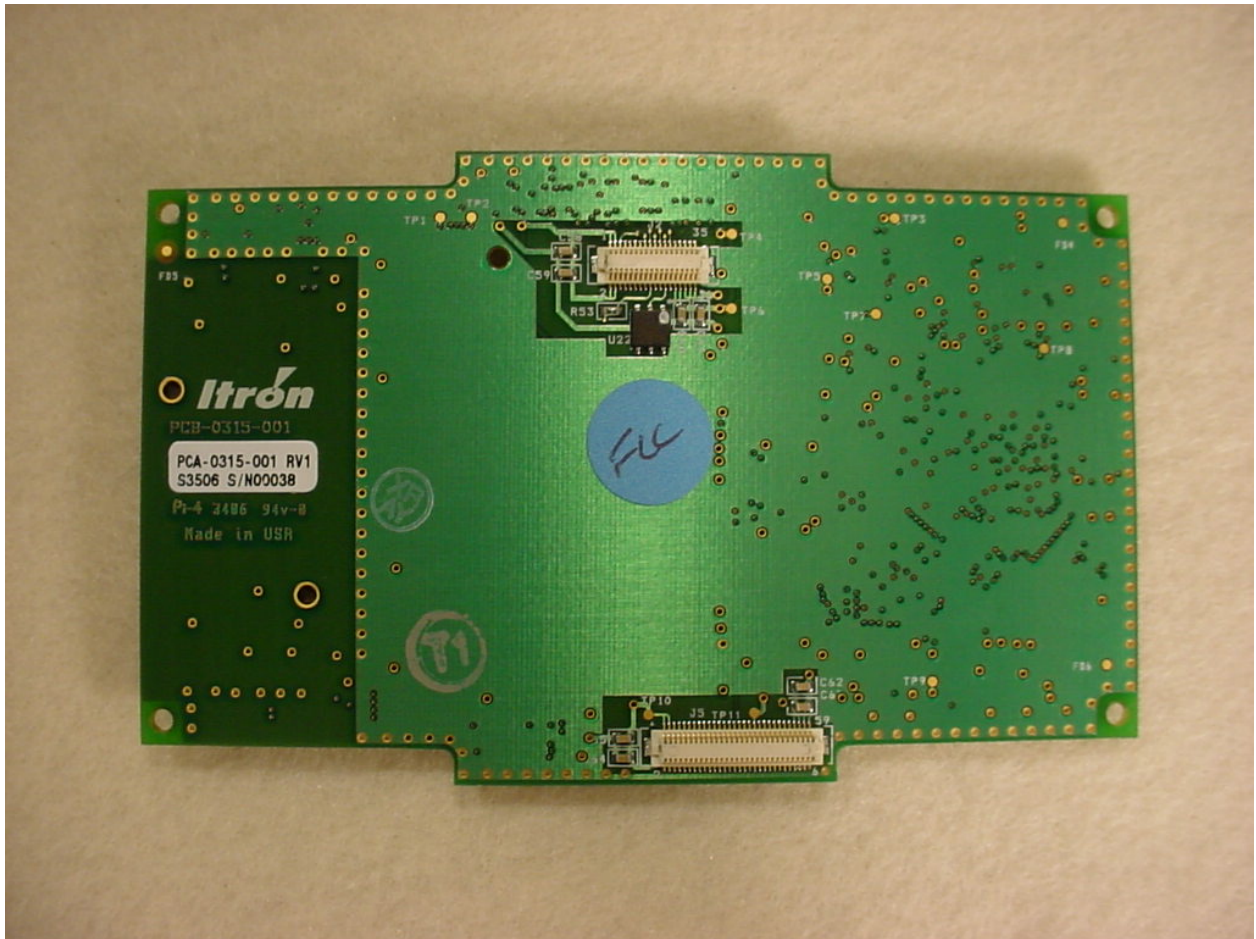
Internal – Mezzanine GPRS Modem Board Back (GPRS & GPRS + Ethernet Sub Assemblies Only)
